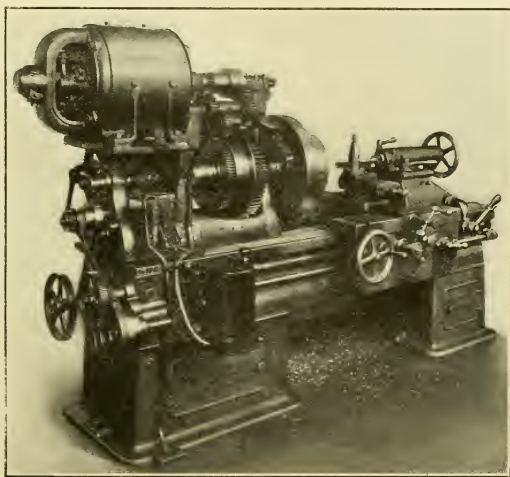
24-IN. FITCHBURG LATHE DRIVEN BY MOTOR, WITH REVERSING GEARS
